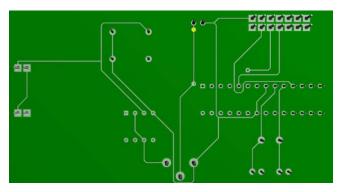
Backside view of the PCB showing the tri-layer component connections of the designed circuit in Proteus
